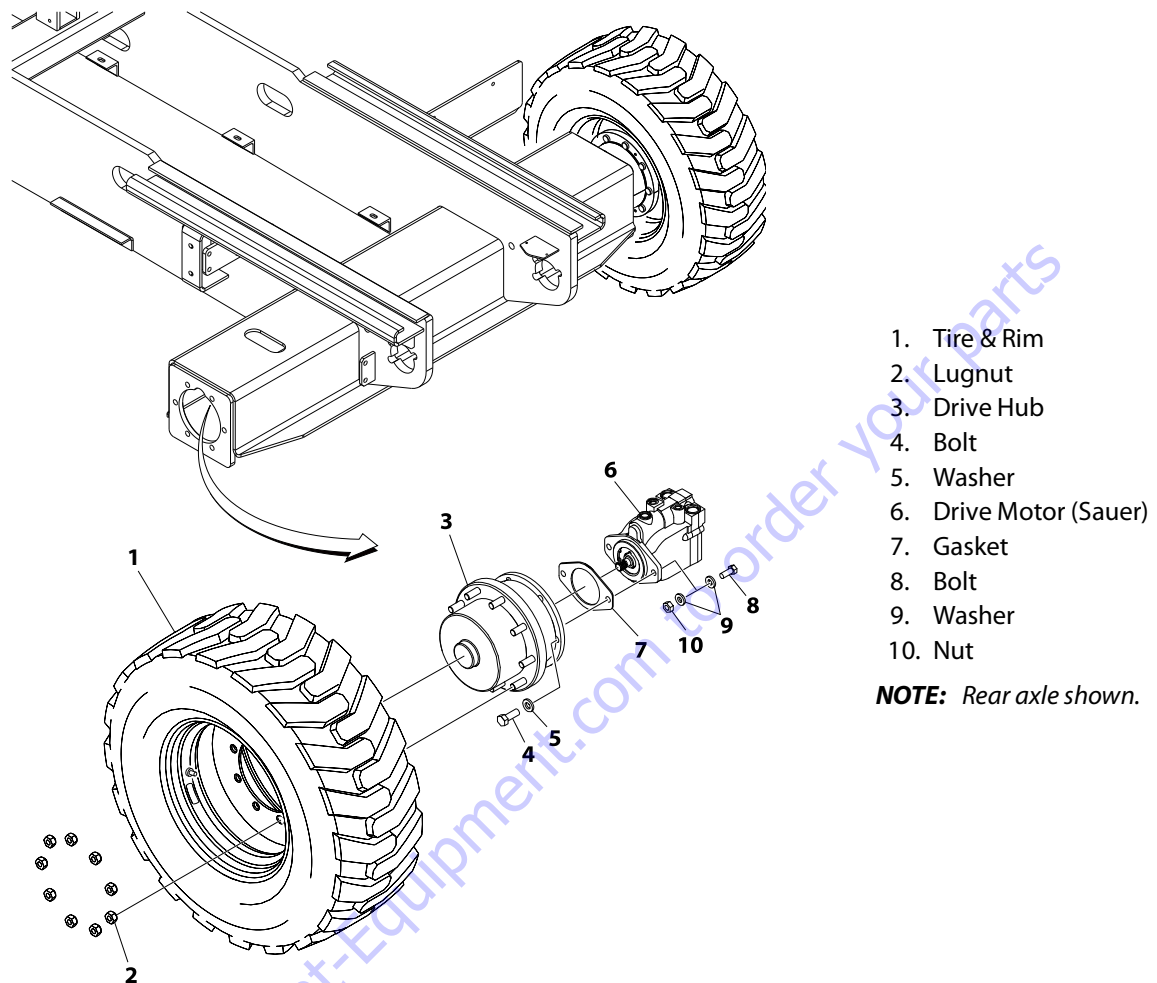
Drive Assembly (Fairfield/Sauer)
